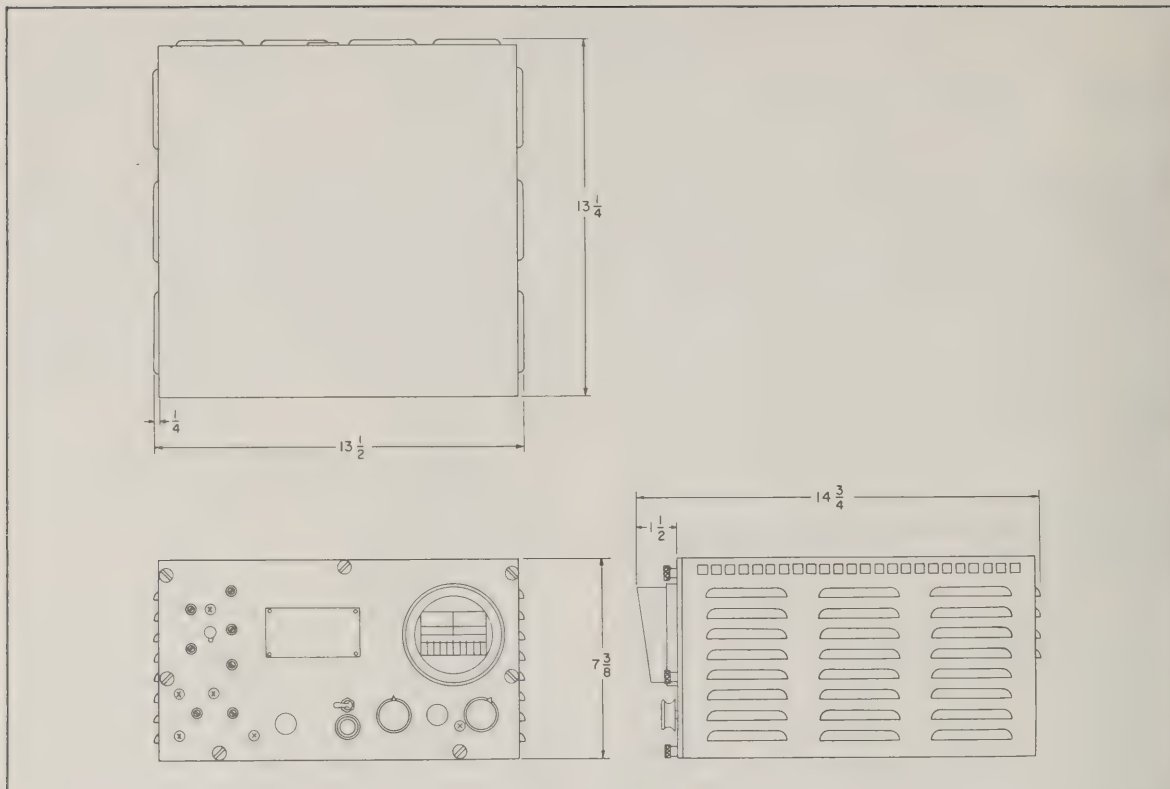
Outline Dimensional Drawing, Model SA-3, Type T-2000NC, In Cabinet.
